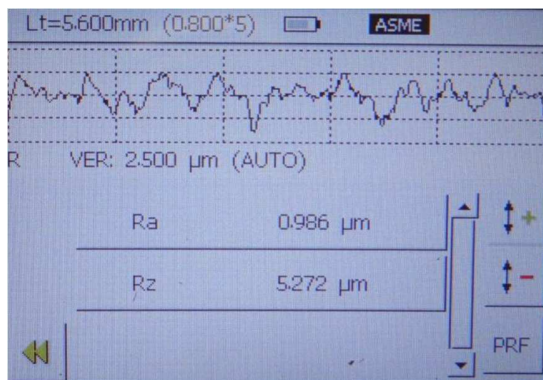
A sample of roughness measurement on selective laser remelted surface (After applying laser surface re-melting step)
